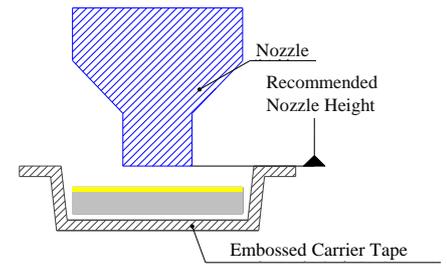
Recommended Nozzle Height for Pick-up Operations Dimensions
